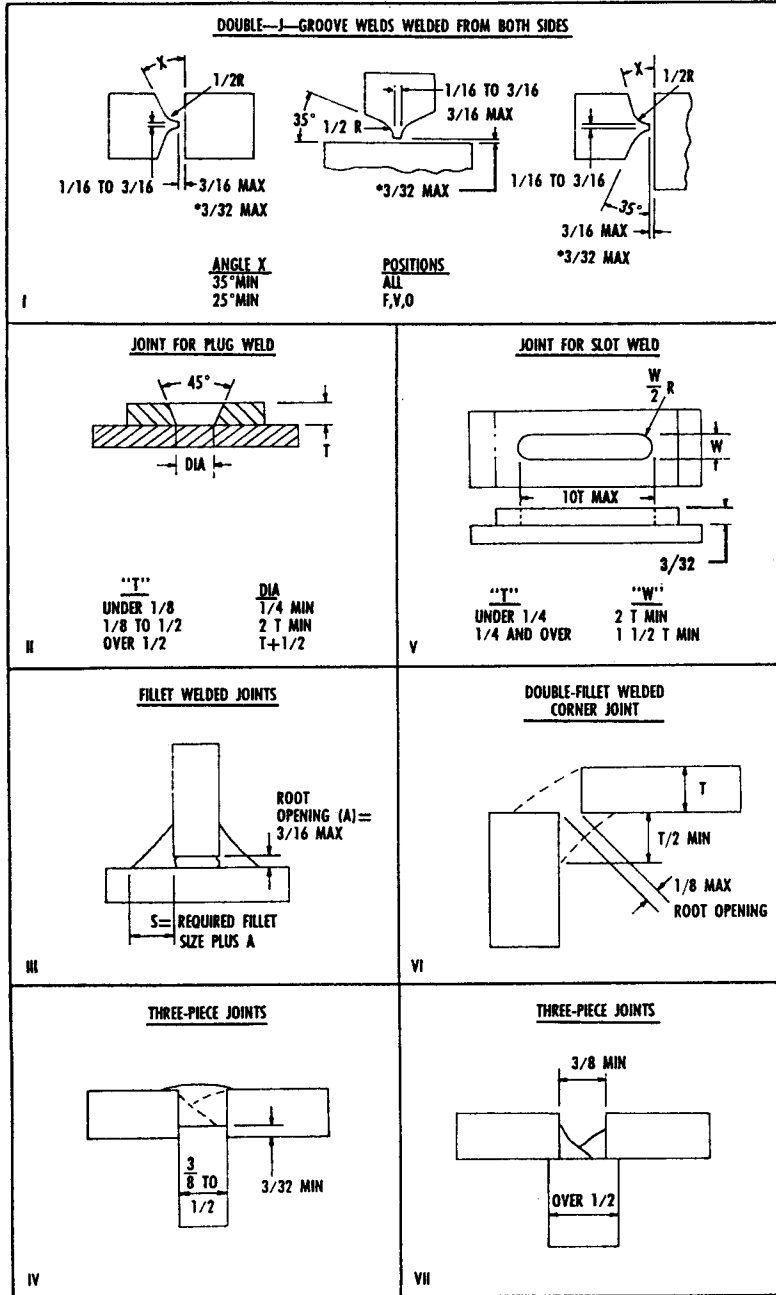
Recommended proportions of grooves for shielded metal-arc, gas metal-arc, gas tungsten-arc, flux-cored arc and gas welding (except pressure gas welding). Note: Dimensions marked \* are exceptions that apply specifically to gas metal-arc welding (34).
